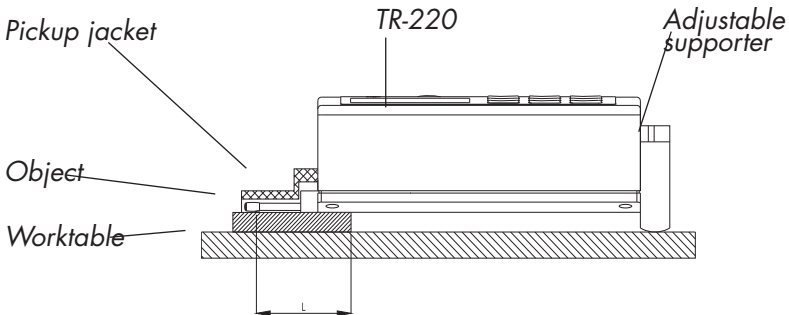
The using method for adjustable rack and sensor sheath
